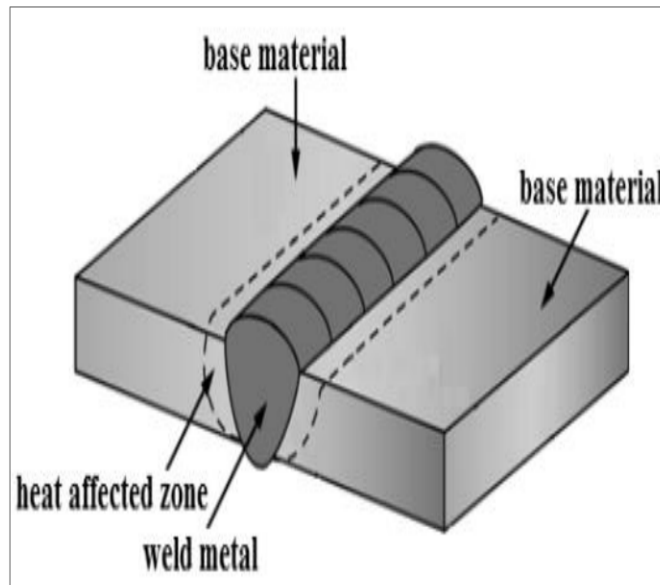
Presentation of a butt weld (Arsić et al., 2013).
